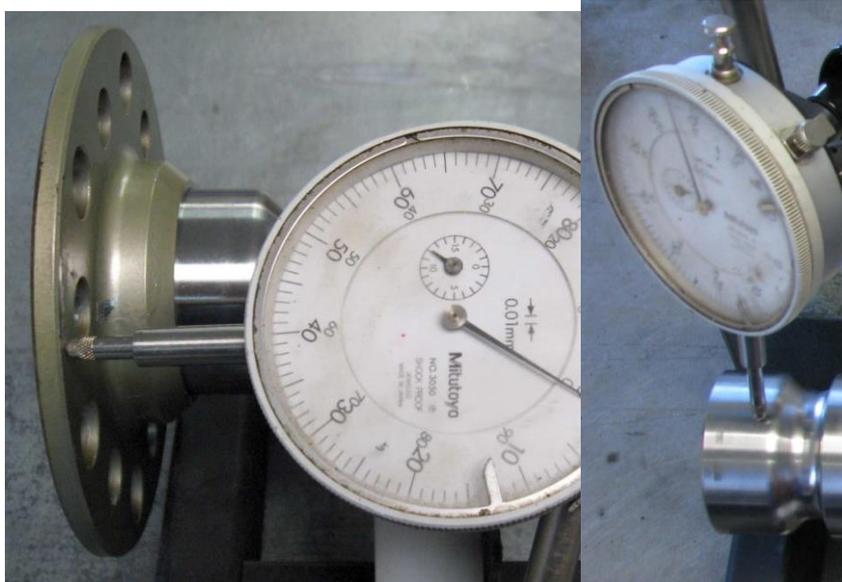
Measuring Propeller Flange & Crank Run-Out
